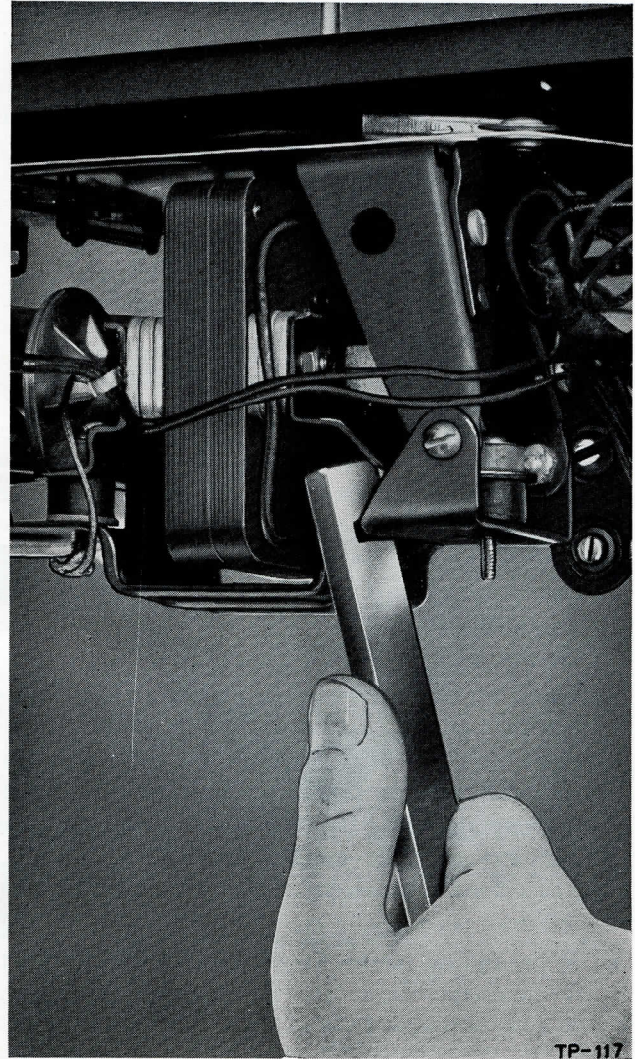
RESHAPING MOTOR-MOUNTING PLATE
